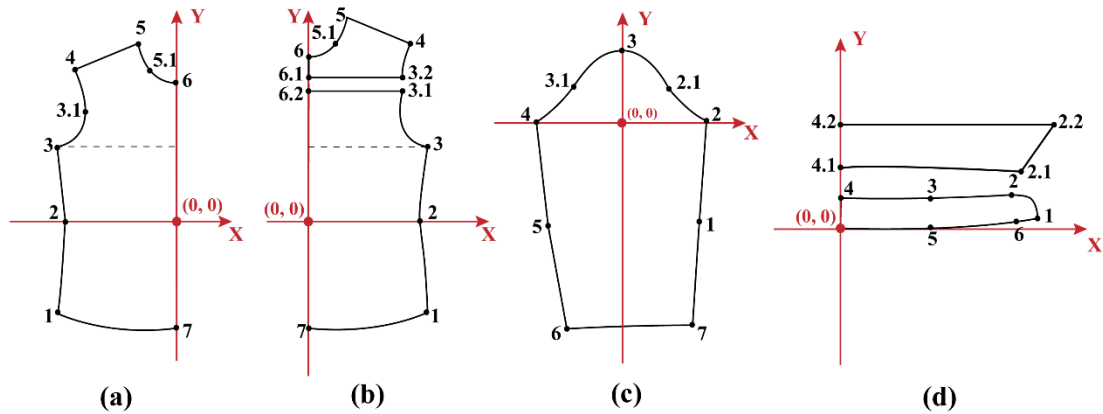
The Coordinate Axes and Grading Points for Pattern Pieces of Male Shirt M: (a) Front Piece; (b) Back Piece; (c) Sleeve; (d) Collar.
